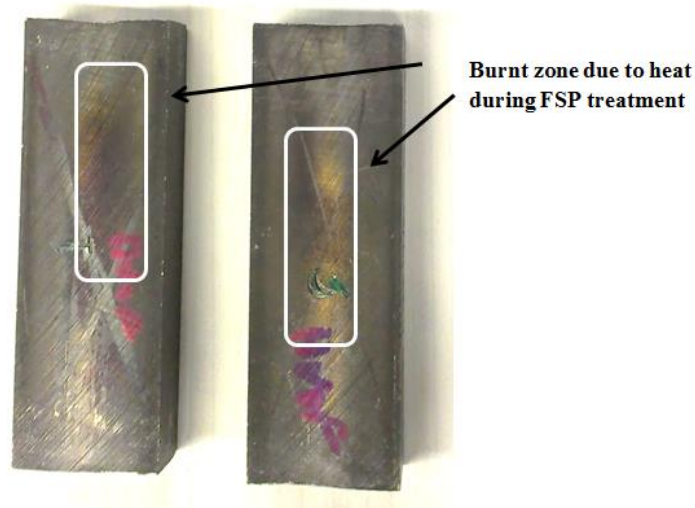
Back side of FSP-treated HVOF-sprayed WC-Ni MMC coating indicating 'heat tinted' zone.
